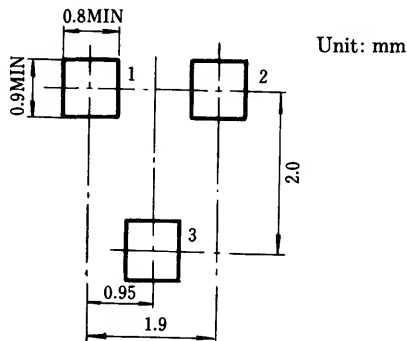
Minimum size of mounting pad size for supermini-transistors
